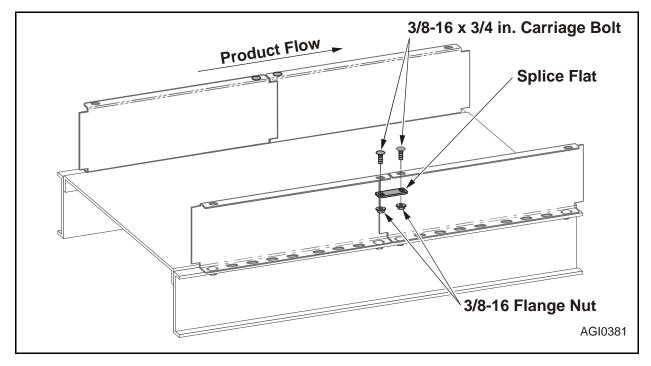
81 Connecting Direct-Mounted Standard Side Guides
